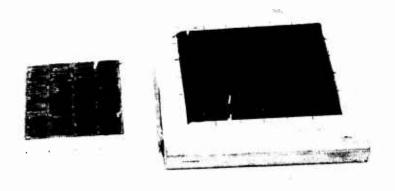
Steel rule blanking tool and blanked plies. (HAC Photo No. R109190)
